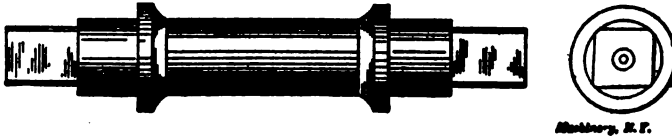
Axle Milled in Fixture Shown in Fig. 25
